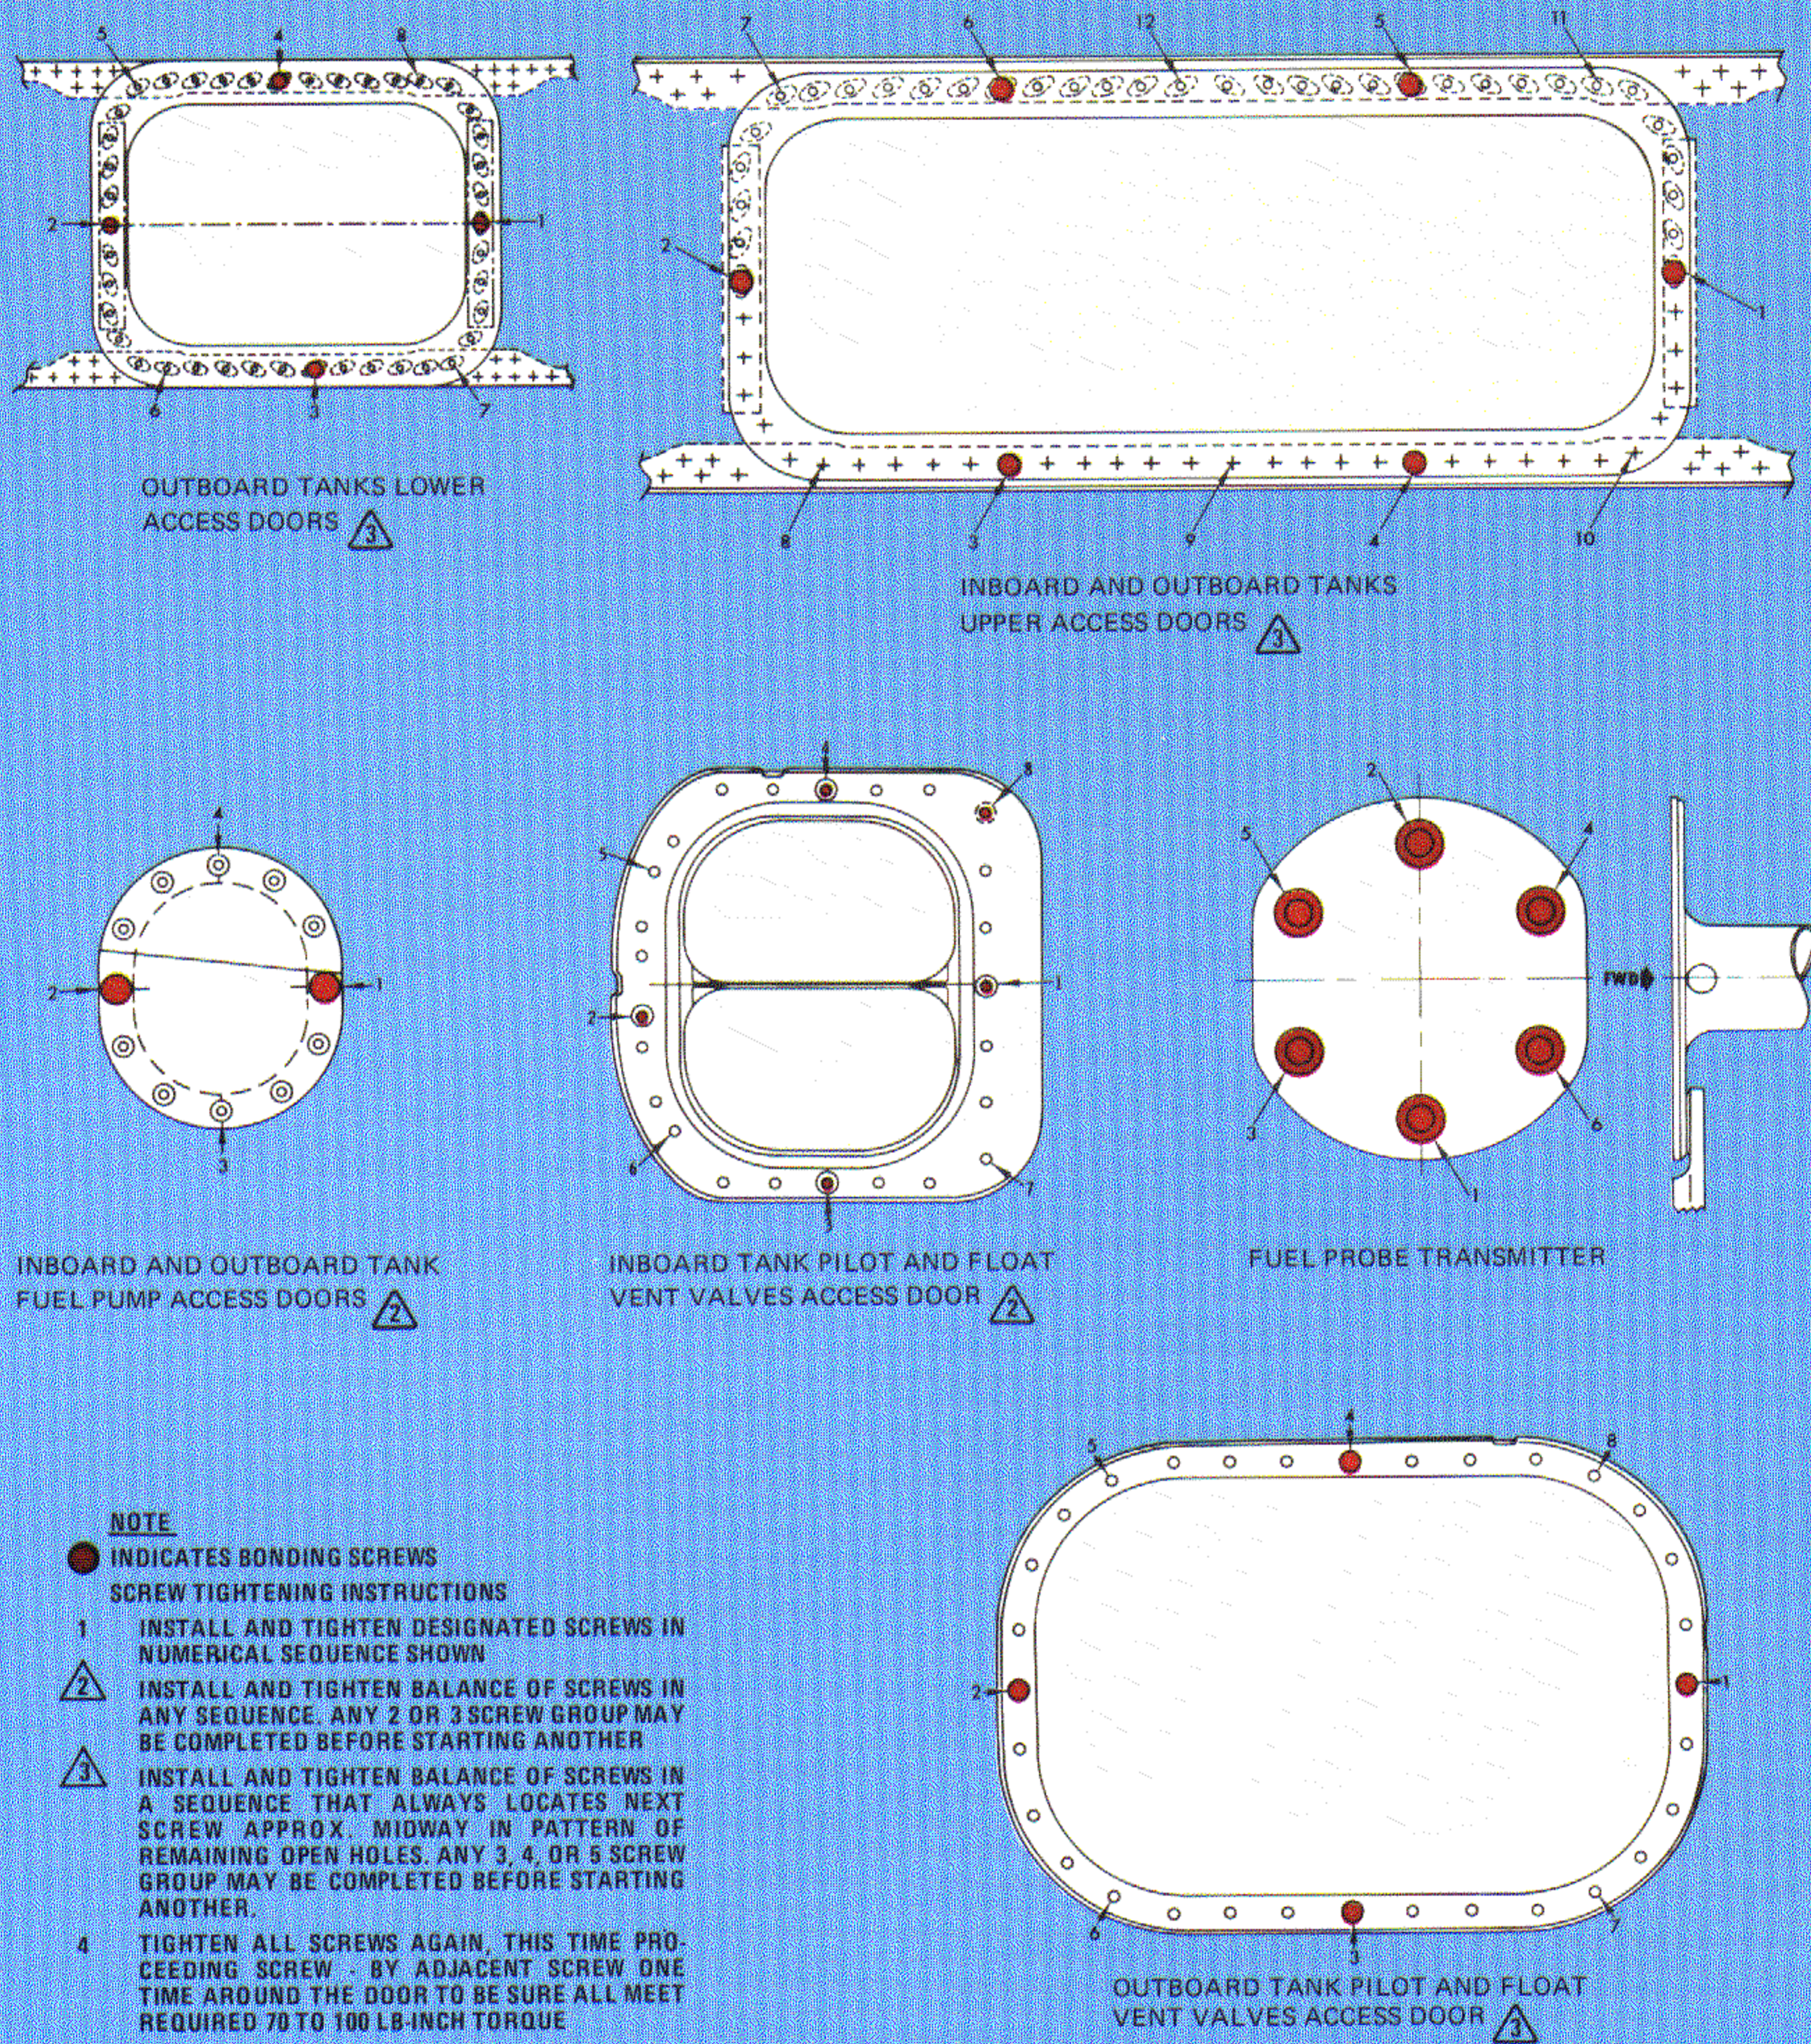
Access Door Screw-Tightening Sequence and Instructions
